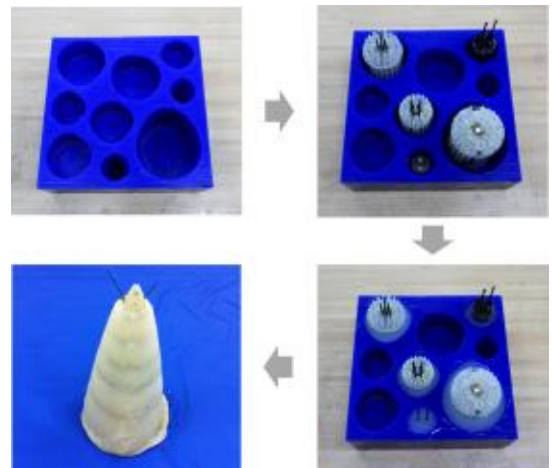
Manufacturing process of the driving parts: First, mold is machined for flexible segments. Second, rigid segments are placed in the mold. Third, silicon is poured over rigid components. Finally, the produced parts are attached. Adapted from [21]
